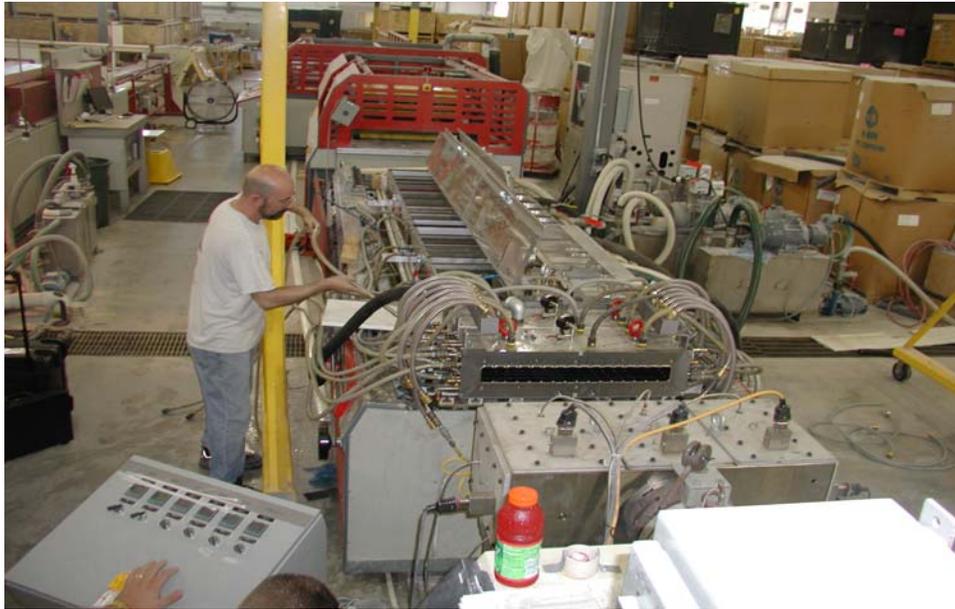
Extruding line for NOvA prototype production. A partial view of the extruding machine is at the bottom right of the picture with the prototype 16-cell die just beyond it. The wide opening beyond the die is the entrance to the vacuum sizing tool, which is followed by the water cooling tank. The smaller red object downstream of the cooling tank houses the extrusion puller and the larger red object at the very top of the picture houses the cutting station.
